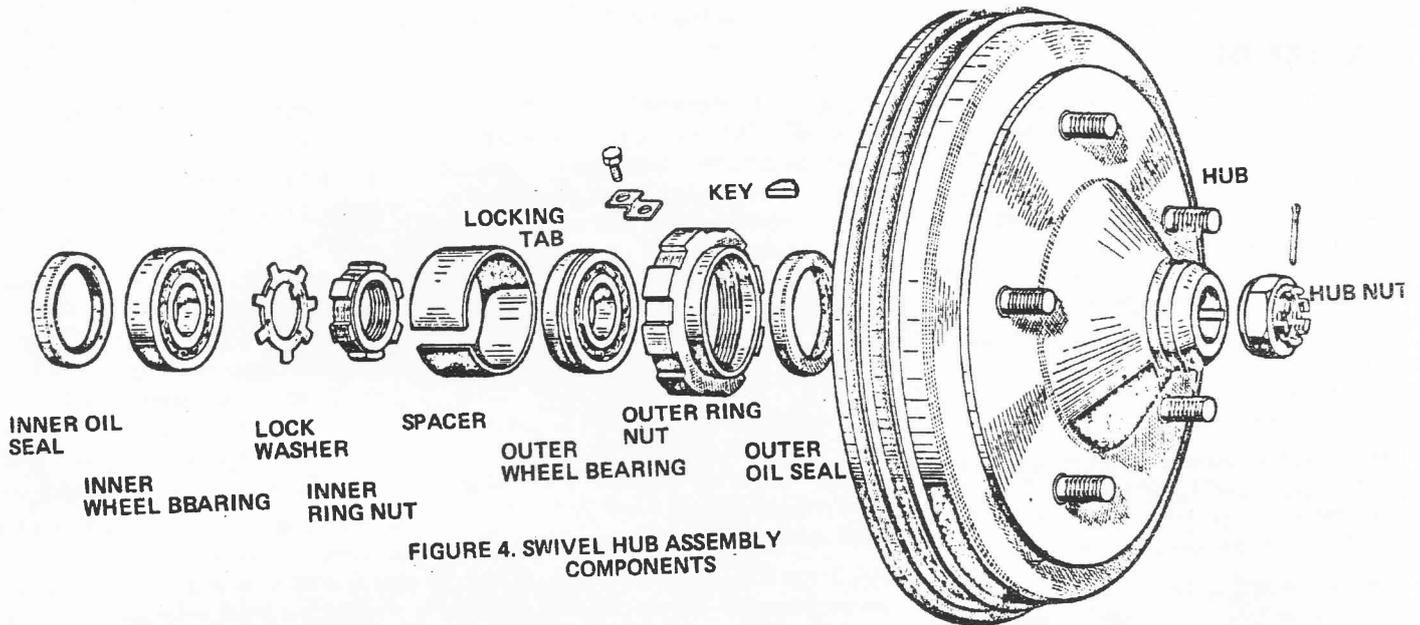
SWIVEL HUB ASSEMBLY COMPONENTS
